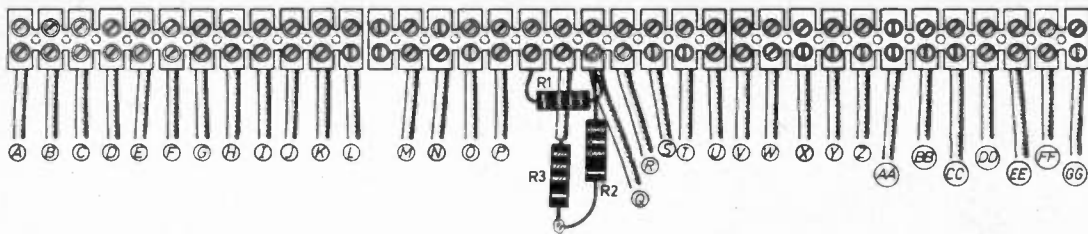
Overhead view of screw terminal blocks showing wiring positions of leads from Control Panel mounted components. You can see the meter series resistors R1, R2 and R3 connected directly to the terminal block and secured by the terminal block screws. Solder R2 and R3 after they are secured to the block.
